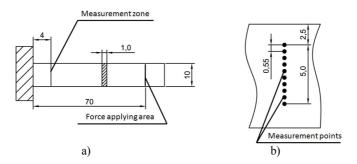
Drawing of the specimen (a) and measurement zone (b)
